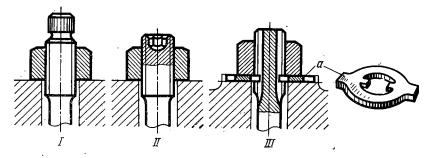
Methods for prevention of bolt twisting in course of nut tightening
